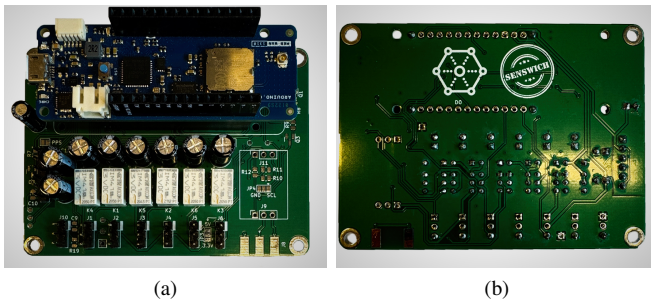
Front part (a) and back part (b) of the SENSWICH PCB.
